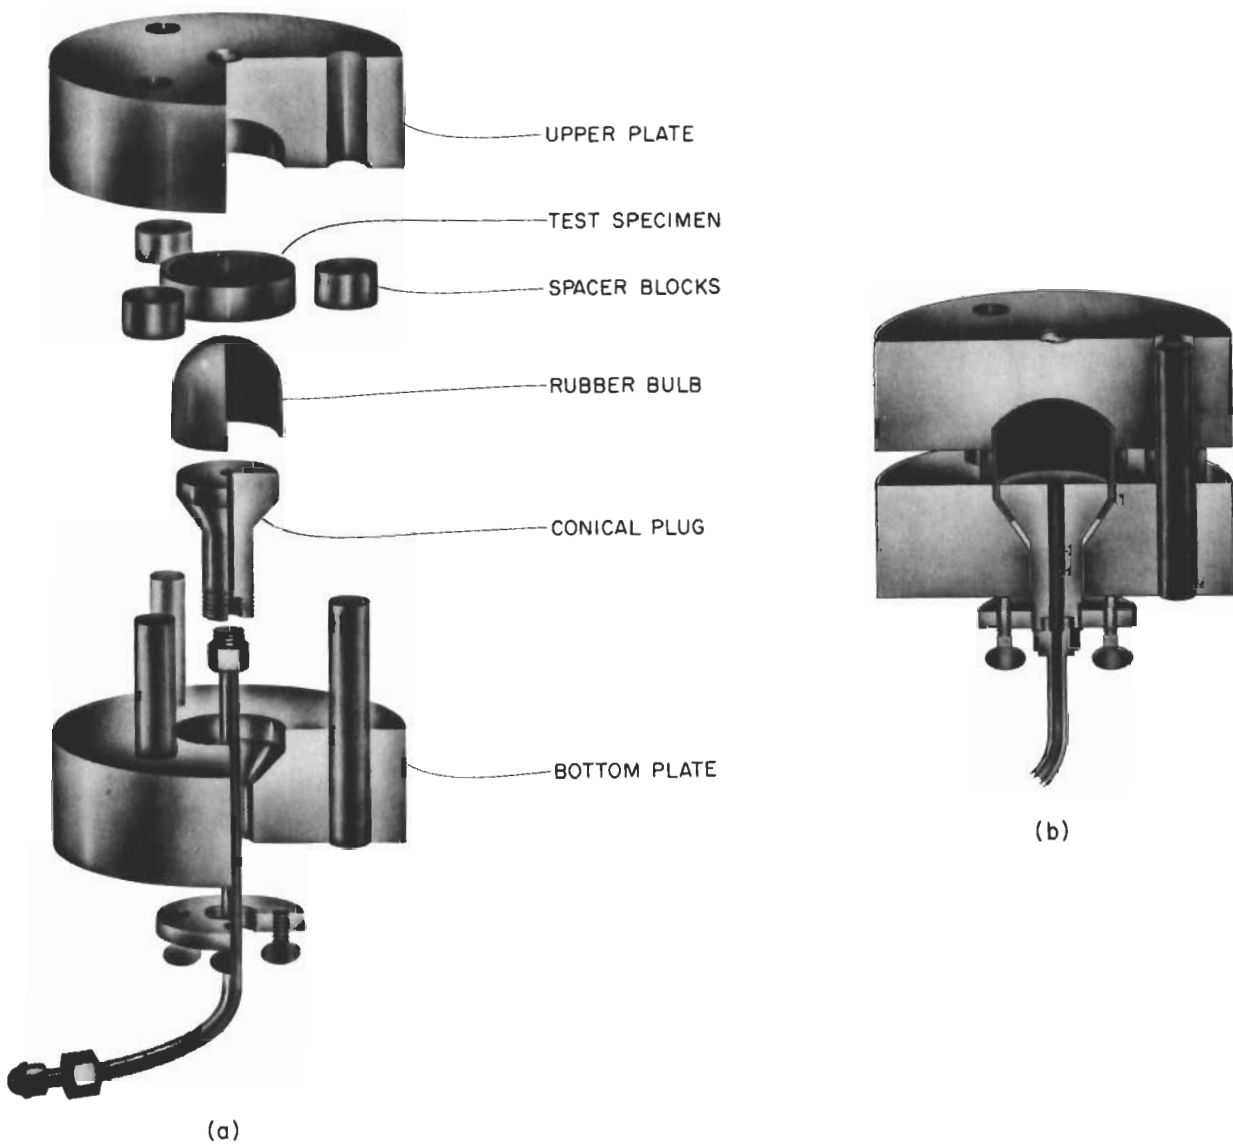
TENSILE TEST SPECIMEN HOLDER
